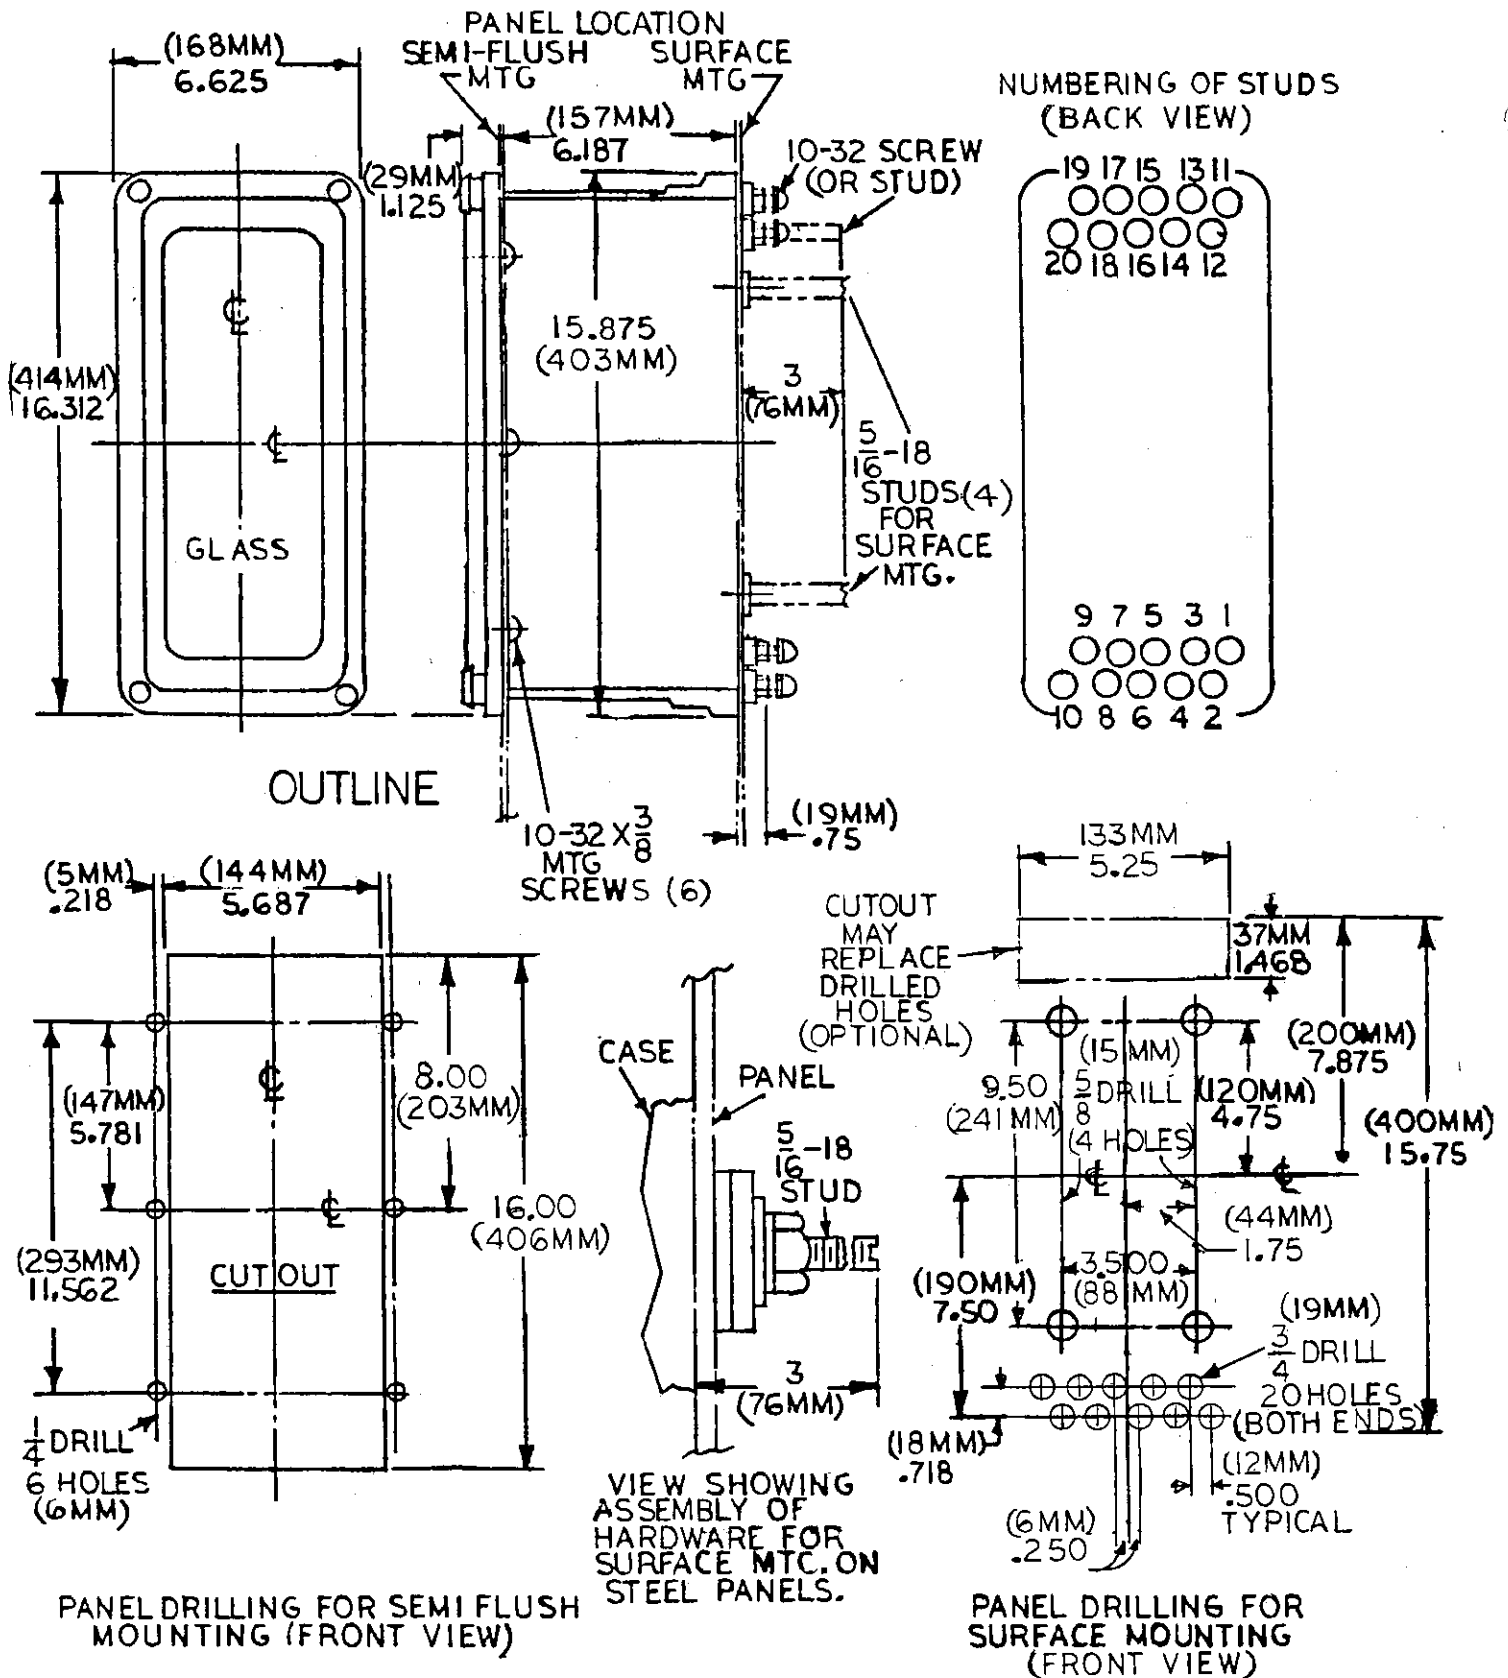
(K-6209274-3) Outline and Panel Drilling Dimensions
